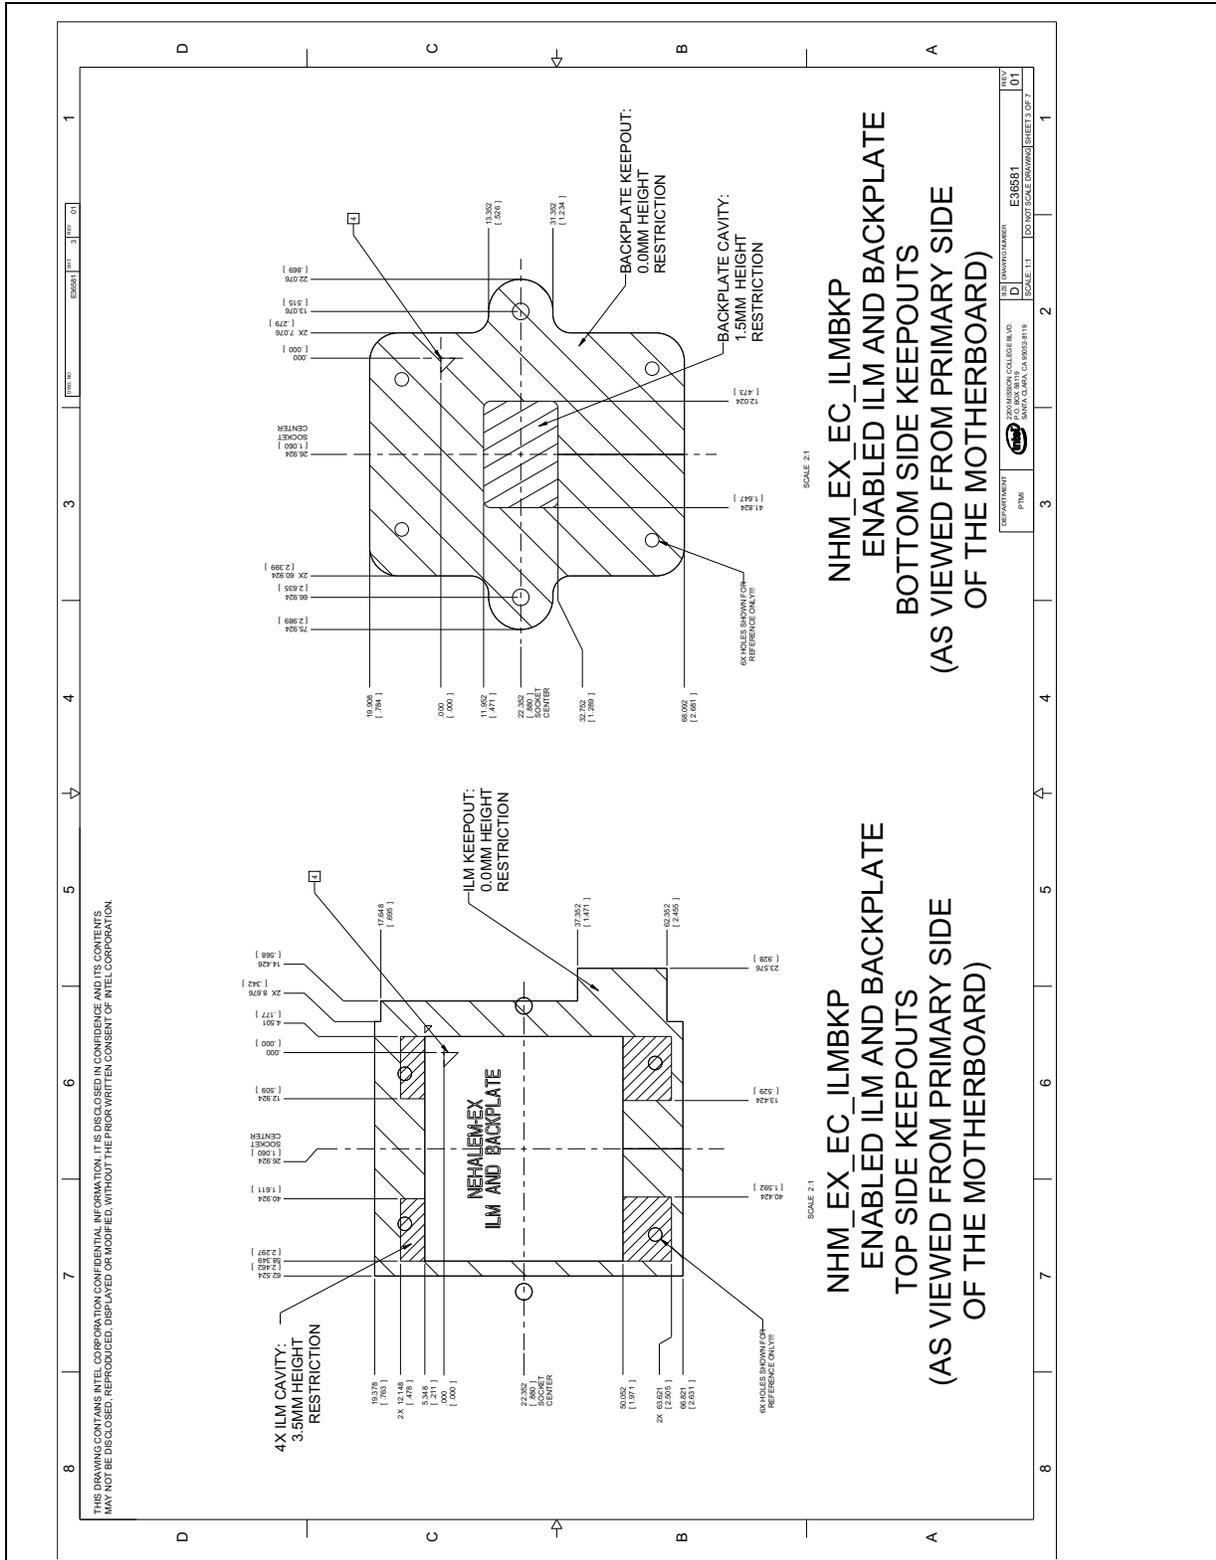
Enabled Component Board Keepout Mechanical Drawing – Sheet 4 of 7
